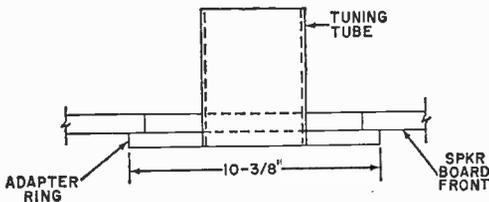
If a ported enclosure is desired, an adapter ring is required for mounting port in 9" hole.
